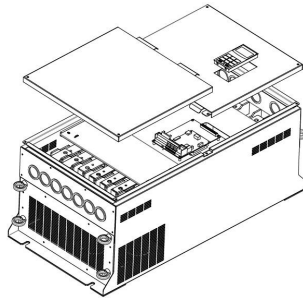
Disassembly drawing of lower cover plate of metal plate shell
